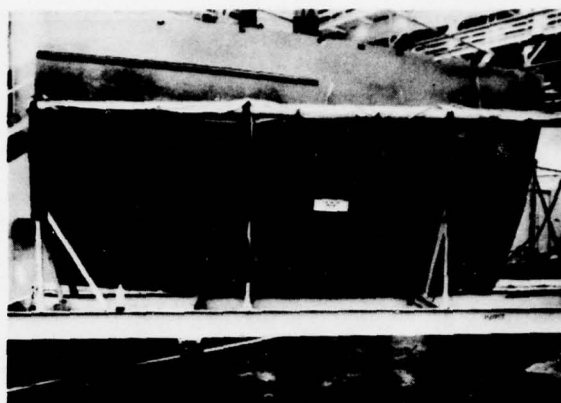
EXTERNALLY STIFFENED NONCONSTANT PANEL - OUTSIDE
